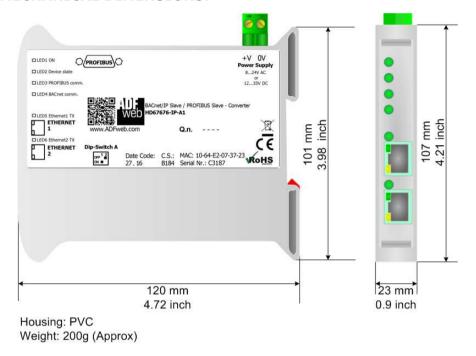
Mechanical dimensions scheme for HD67676-IP-A1
